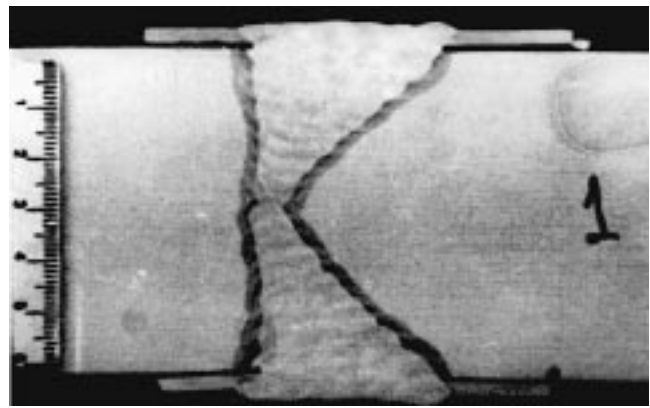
Macrography of the welded joint. Etching with Nital 2
